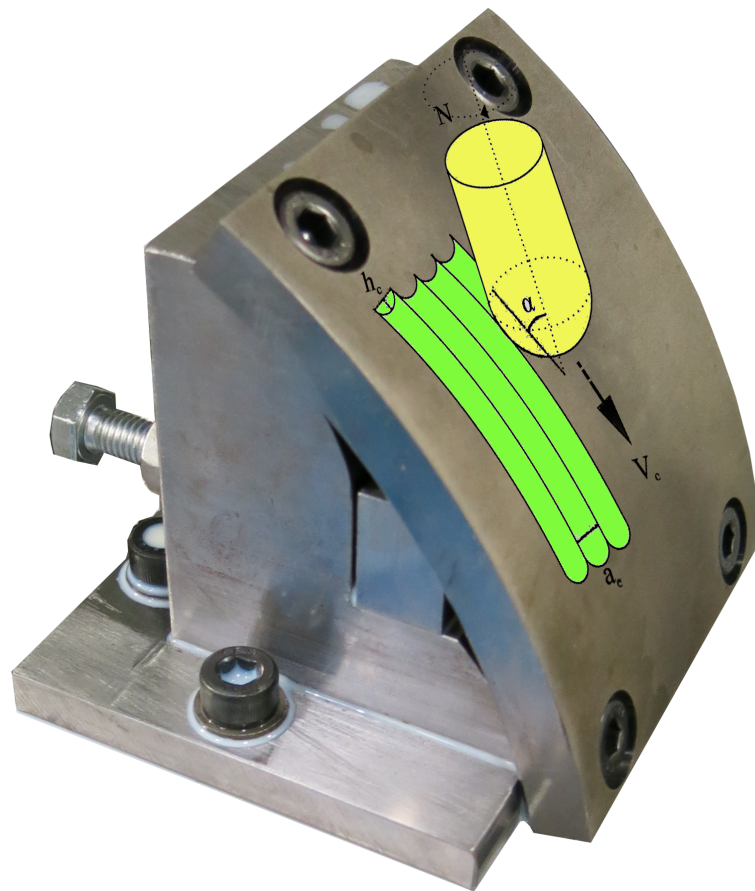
Workpiece and fixture with experimental tool path indicated.
